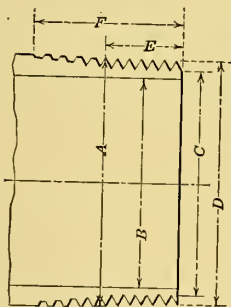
BRIGGS STANDARD PIPE THREAD.
